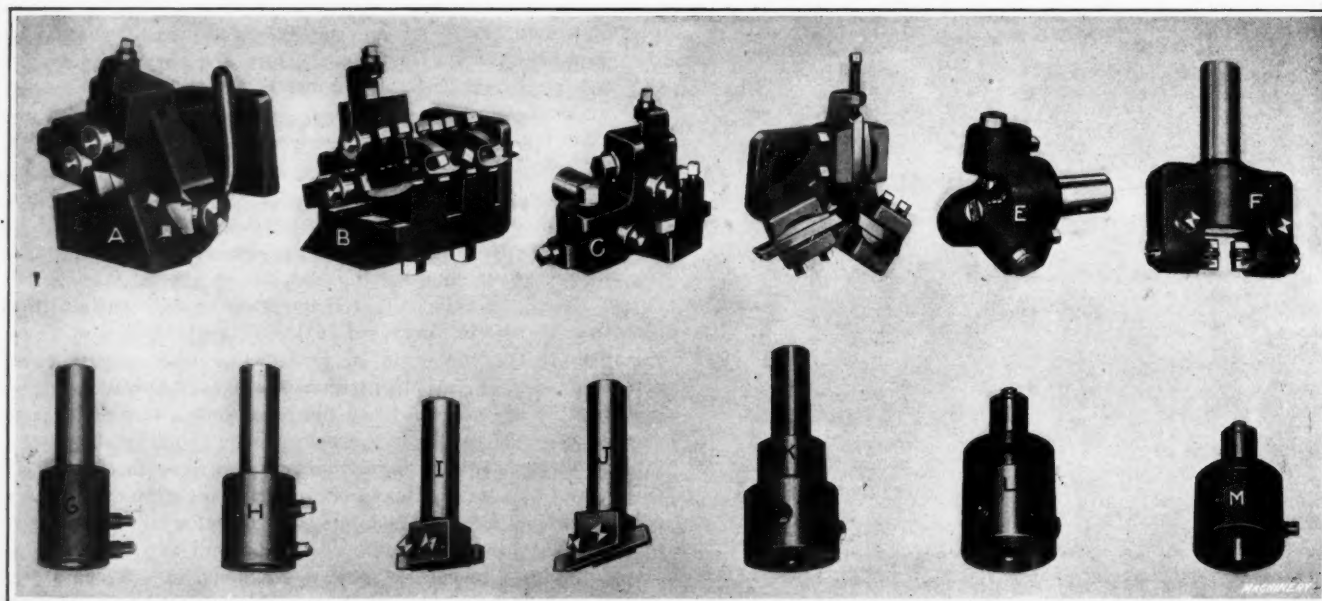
A, Roughing Box-tool; B, Multiple Cutter Turner; C, Pointing Tool; D, Adjustable Hollow-mill; E, Center Drilling Tool; F, Knurling Tool; G to J, Tool-holders; K, Drill-holder; L, Tap-holder; M, Die-holder
